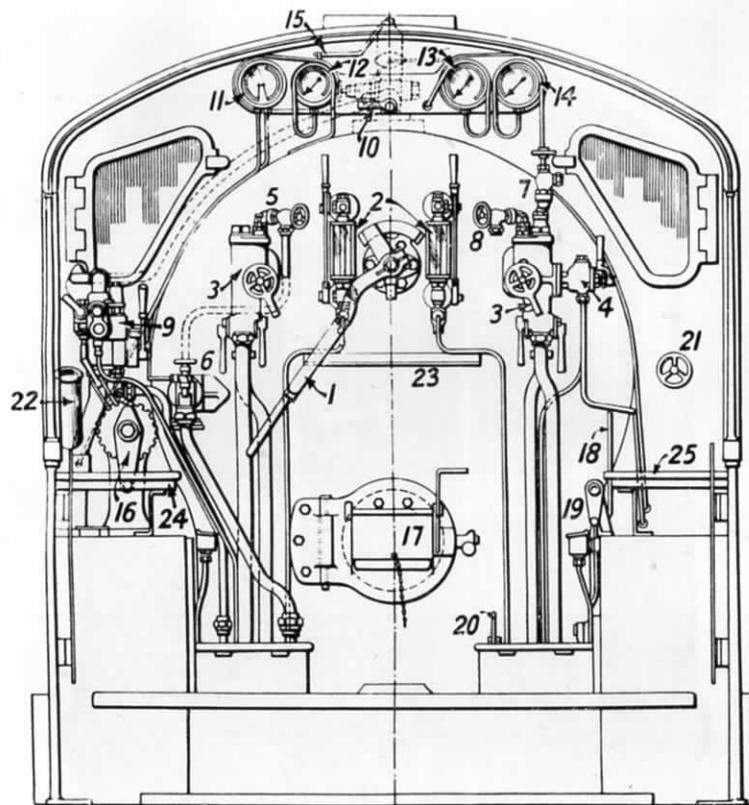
ARRANGEMENT OF FOOTPLATE FITTINGS:
